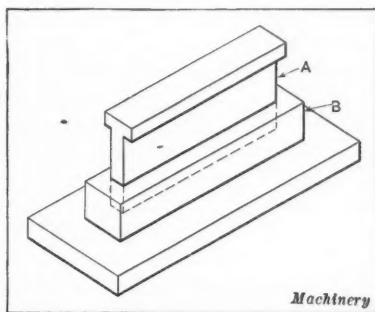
Mold used for compressing the Tungsten Powder into Slug Form
